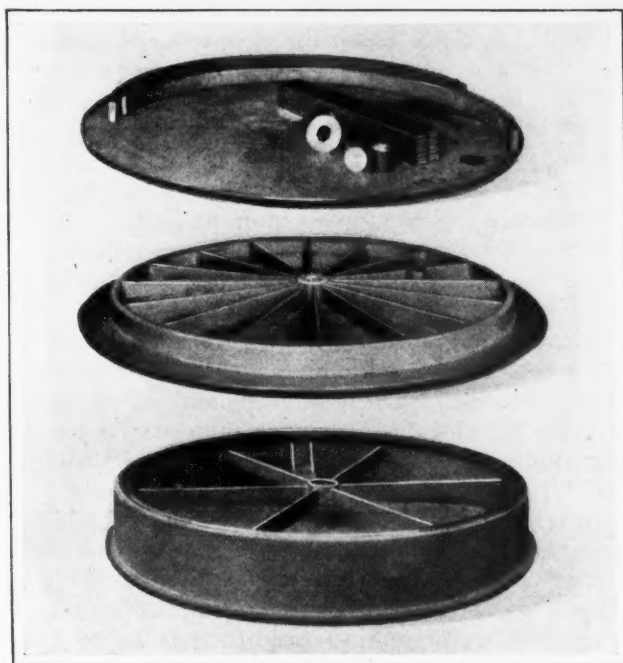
Structural Steel Parts of Table—Table after Welding—Completed Base
